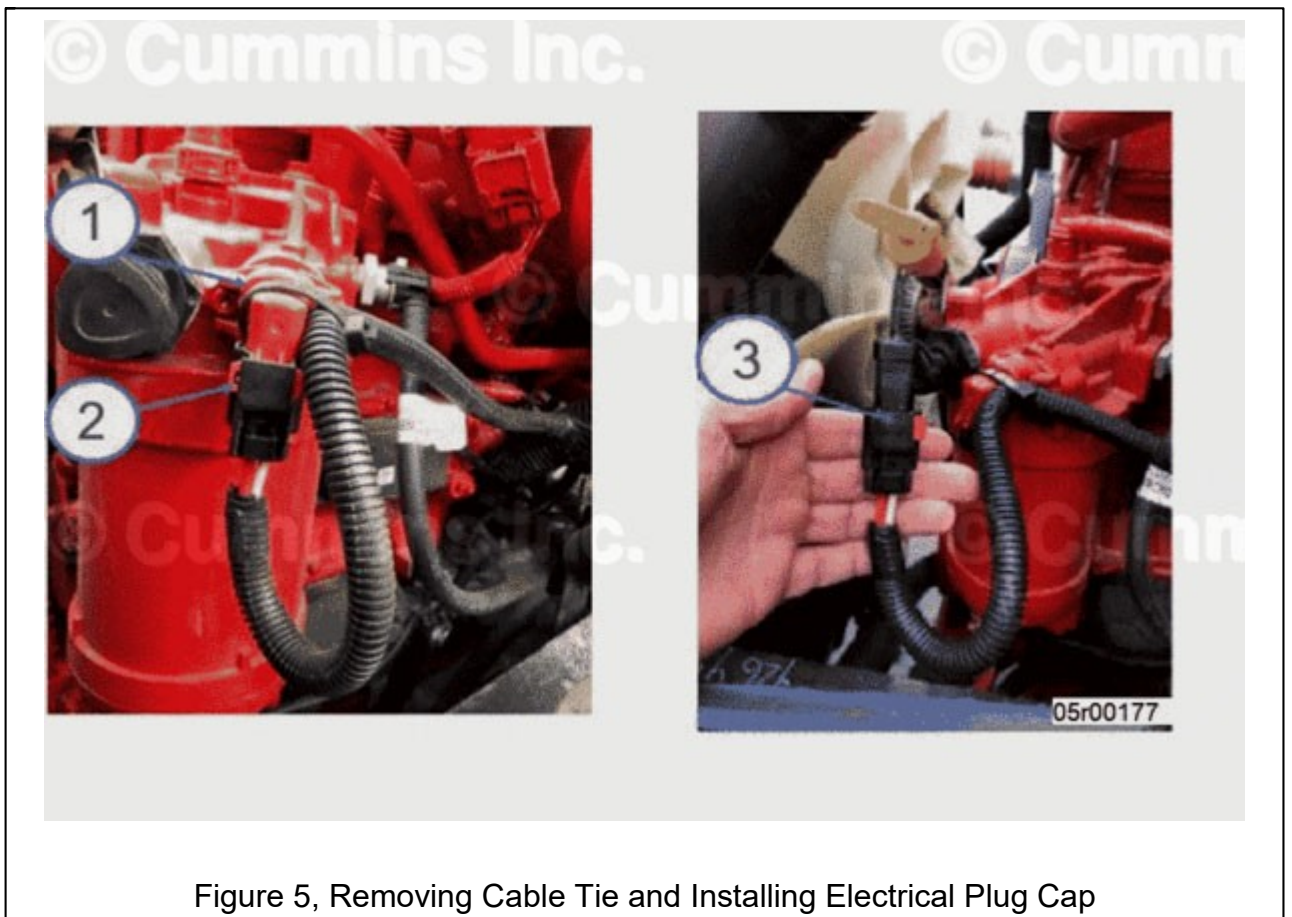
, Removing Cable Tie and Installing Electrical Plug Cap
